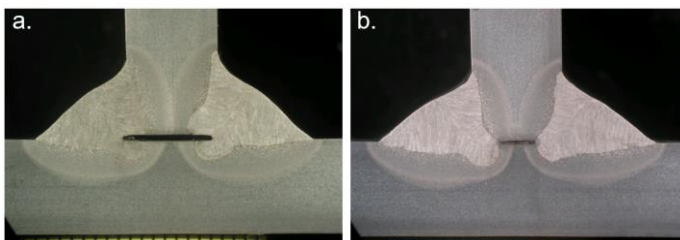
(a) Use of a tungsten at the root to create a theoretically perfect fillet weld without lack of penetration and (b) a normal penetrated weld without tungsten.
